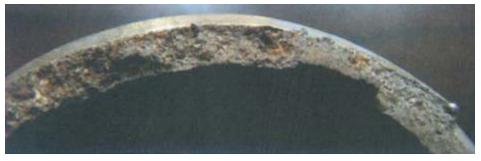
Permanent mold cupro-aluminum casting exhibits shrinkage cavity due to inadequate feeding through bottom gating into the heavier section.
